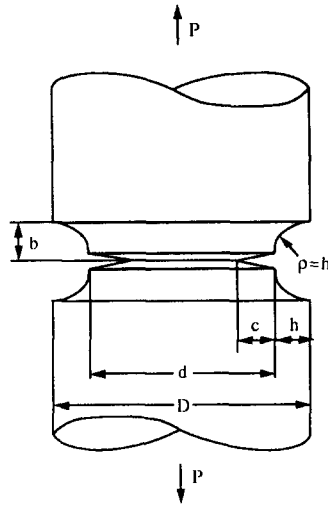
A cylindrical bar having circumferential notch with a crack.
